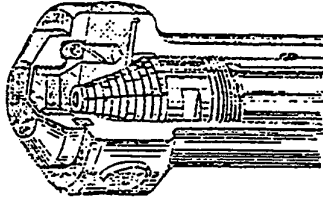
Structure of a three-point type inside micrometer using tapered threads
